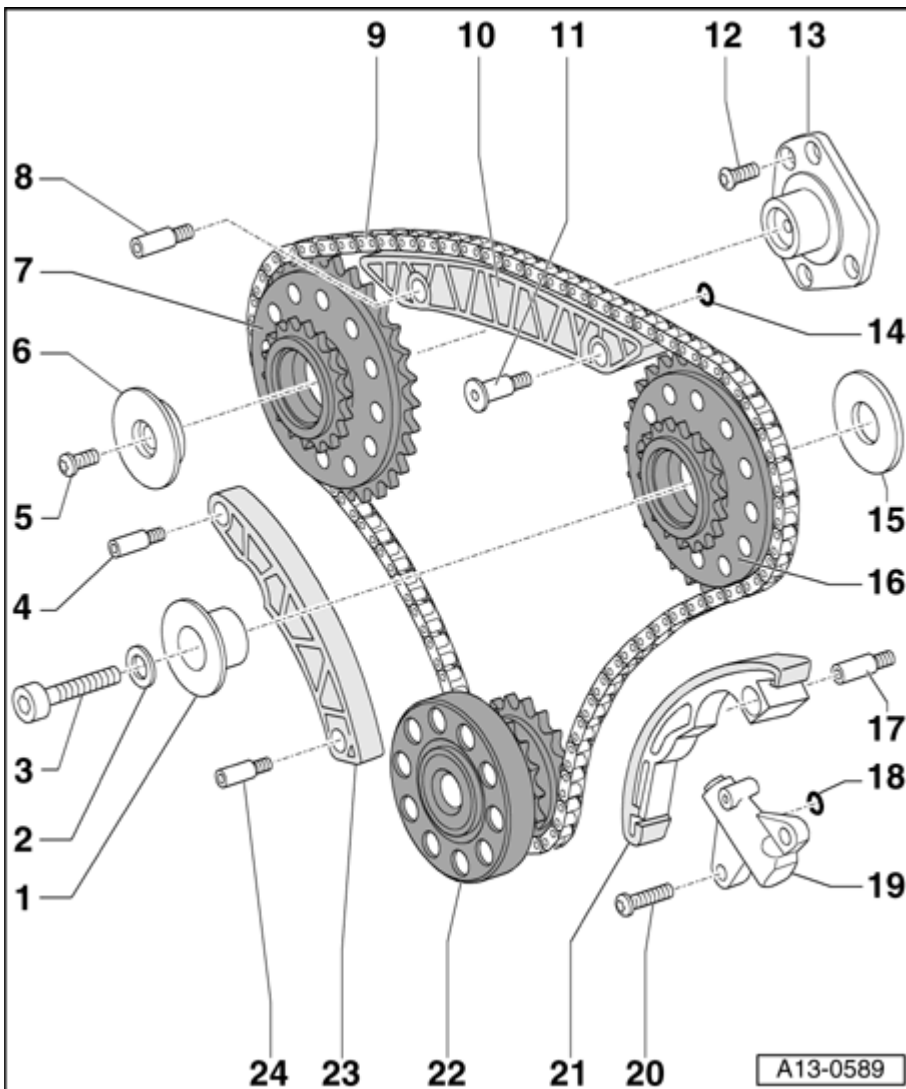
Drive Chain For Timing Mechanism, Component Overview
